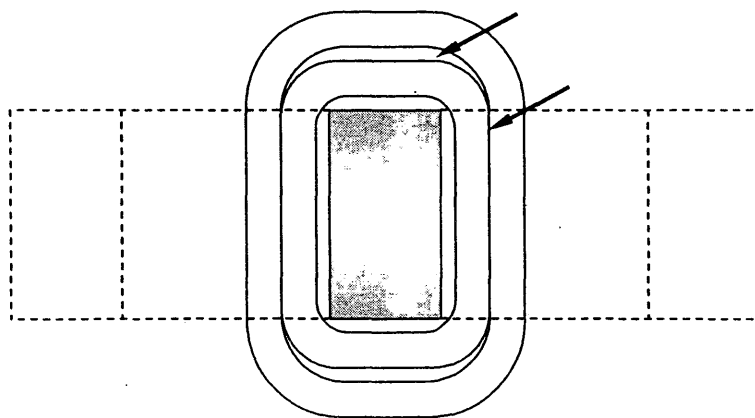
Top view section of a rectangular winding with "collapsed cooling duct arrangement" under the yokes
